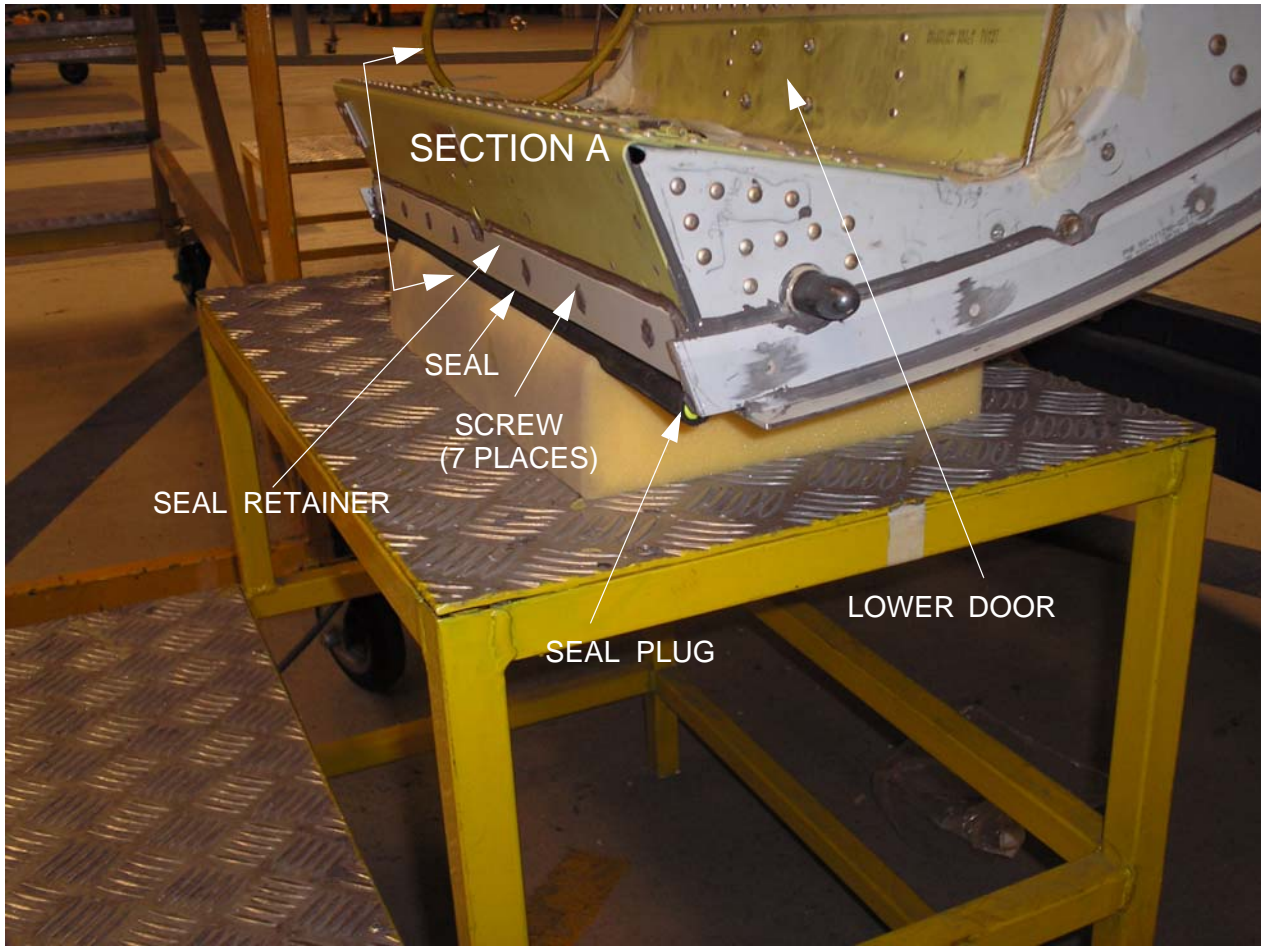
Cabin Lower Door Seal - Removal / Installation (Sheet 3 of 3)
